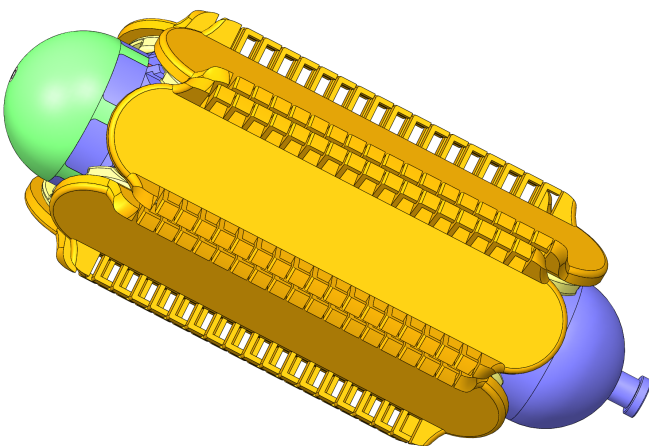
A render of the assembly with the improved L-shaped 3D textures.
